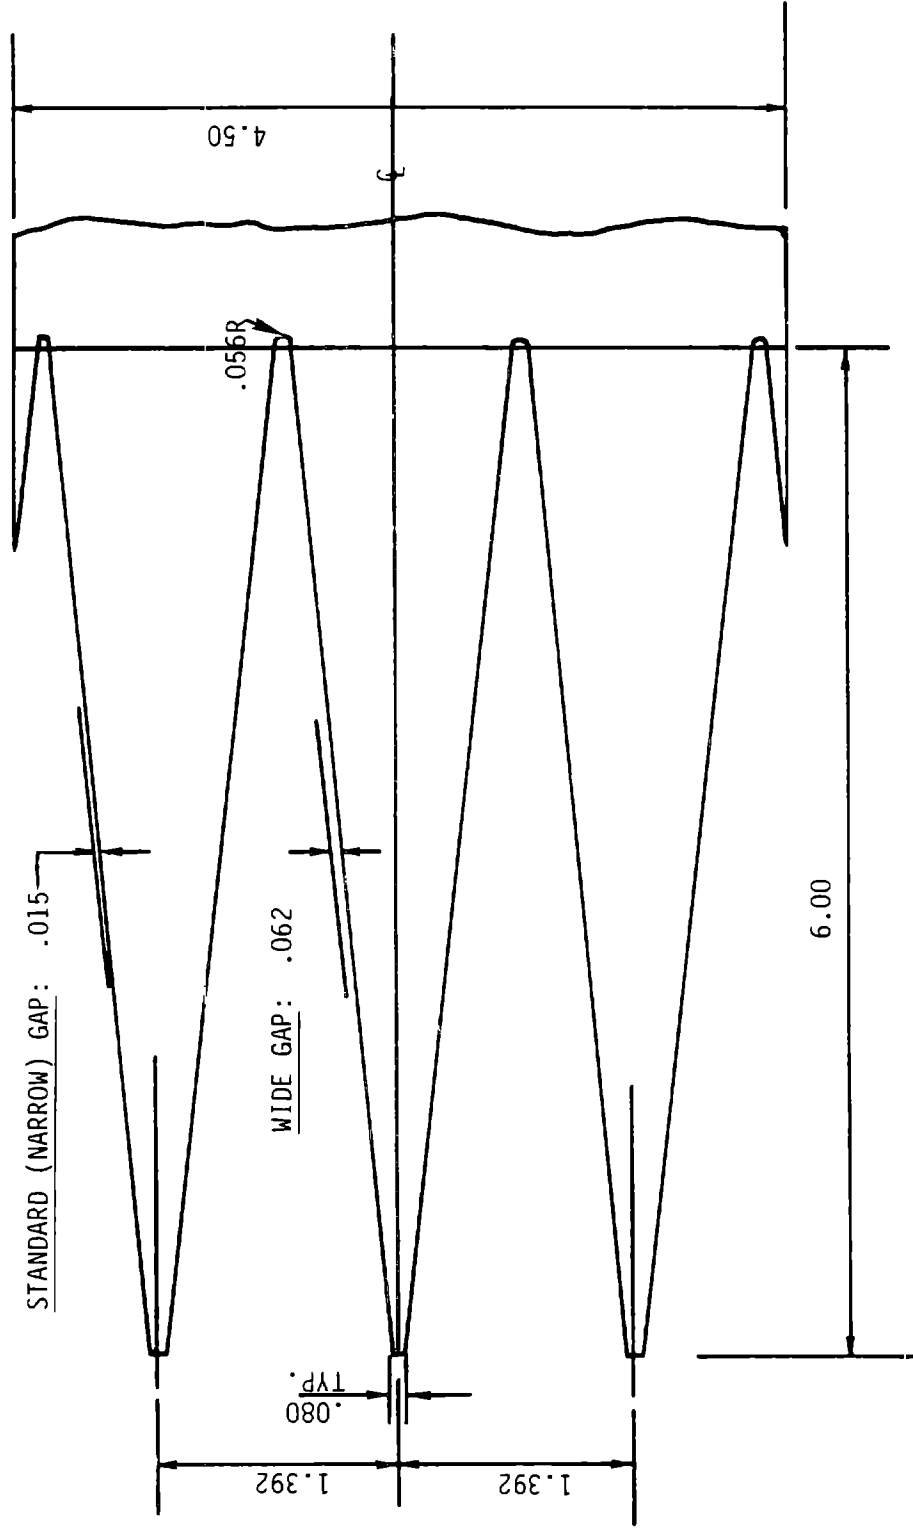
Detail of Machined Fingers of Dogbone Specimens for Fatigue Tests
